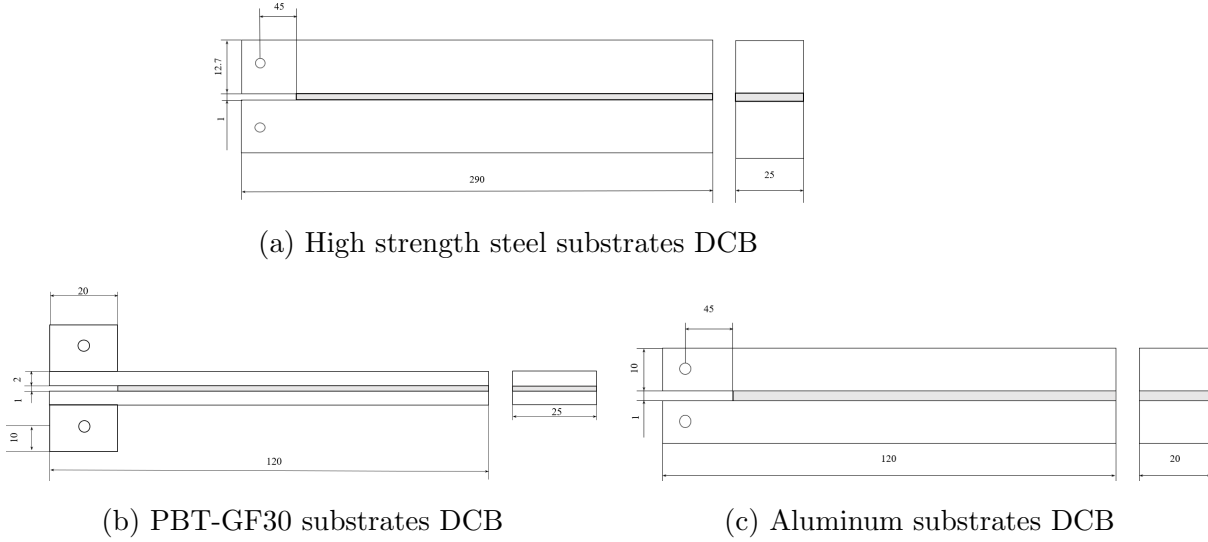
Geometry of the DCB specimens used, dimensions in mm.
